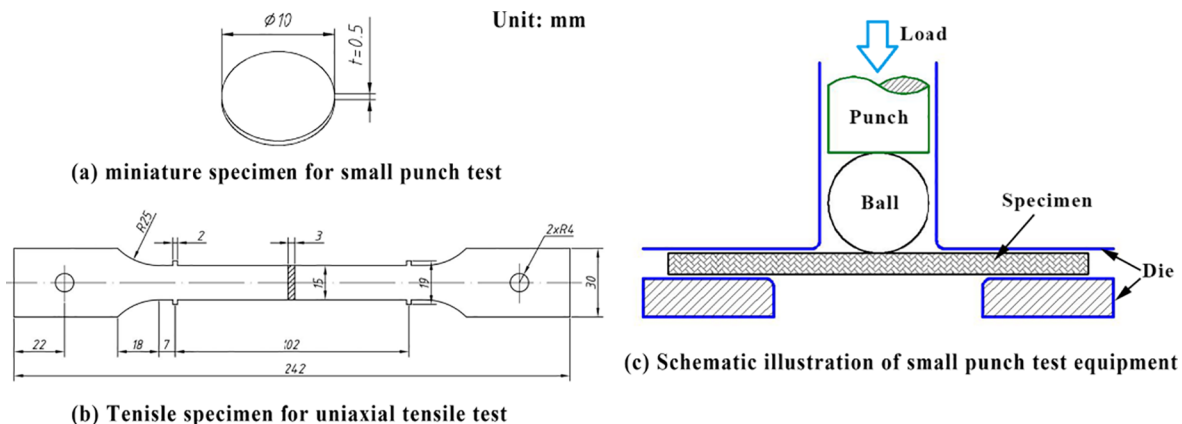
Geometry and dimension of specimens: (a) miniature specimen for small punch test and (b) tensile specimen for uniaxial tensile test; (c) schematic illustration of small punch test equipment.
